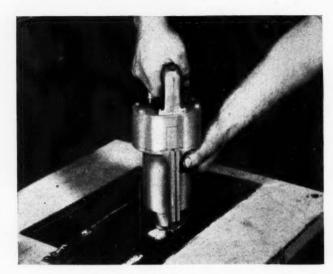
Performing a Silver-soldering Operation on Sheet Steel with a Tocco "Heat Gun"
